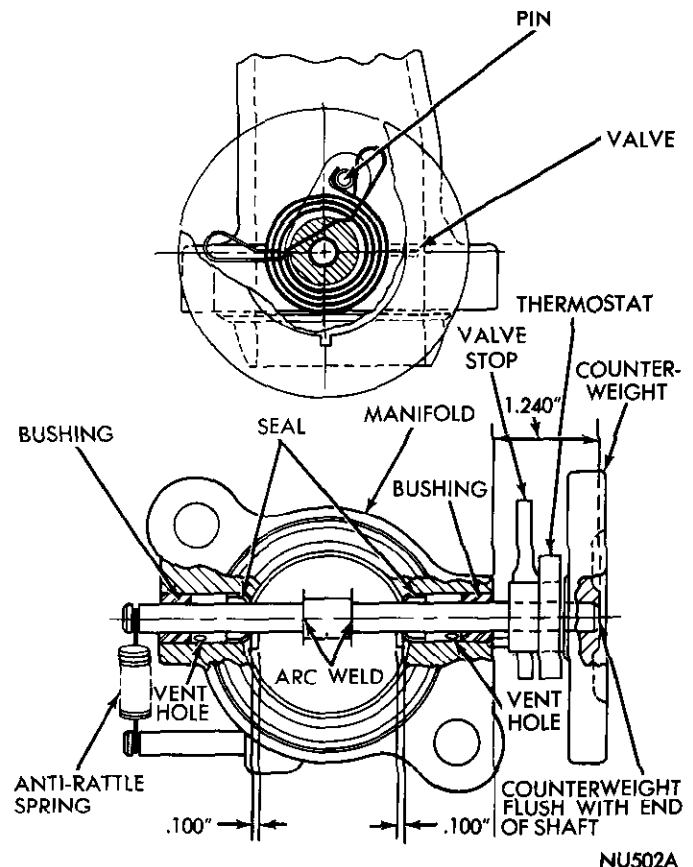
Proper Manifold Heat Control Valve Installation (318 Cubic Inch Engines)
